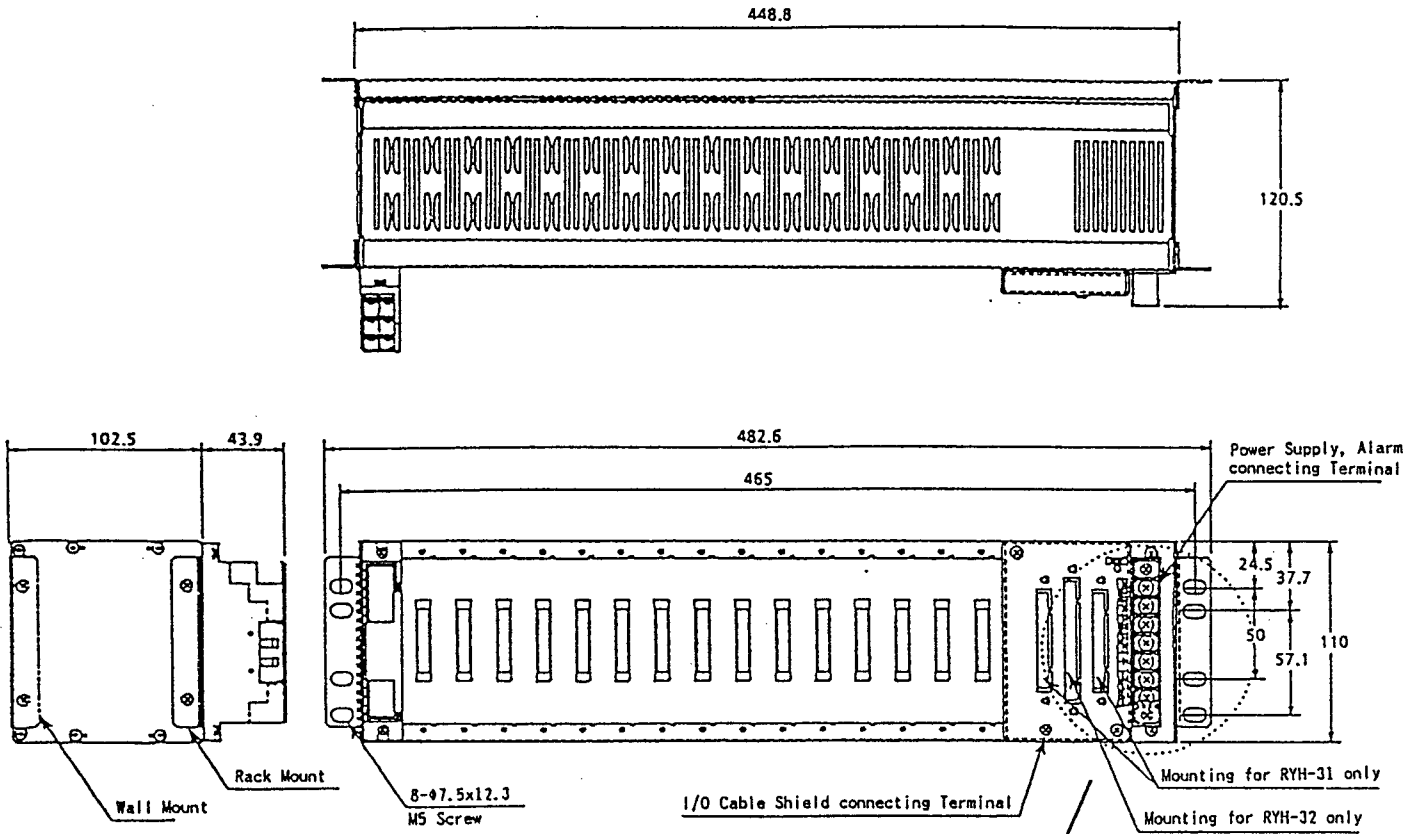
RYH Type Nest (Horizontal Mounting Type)
